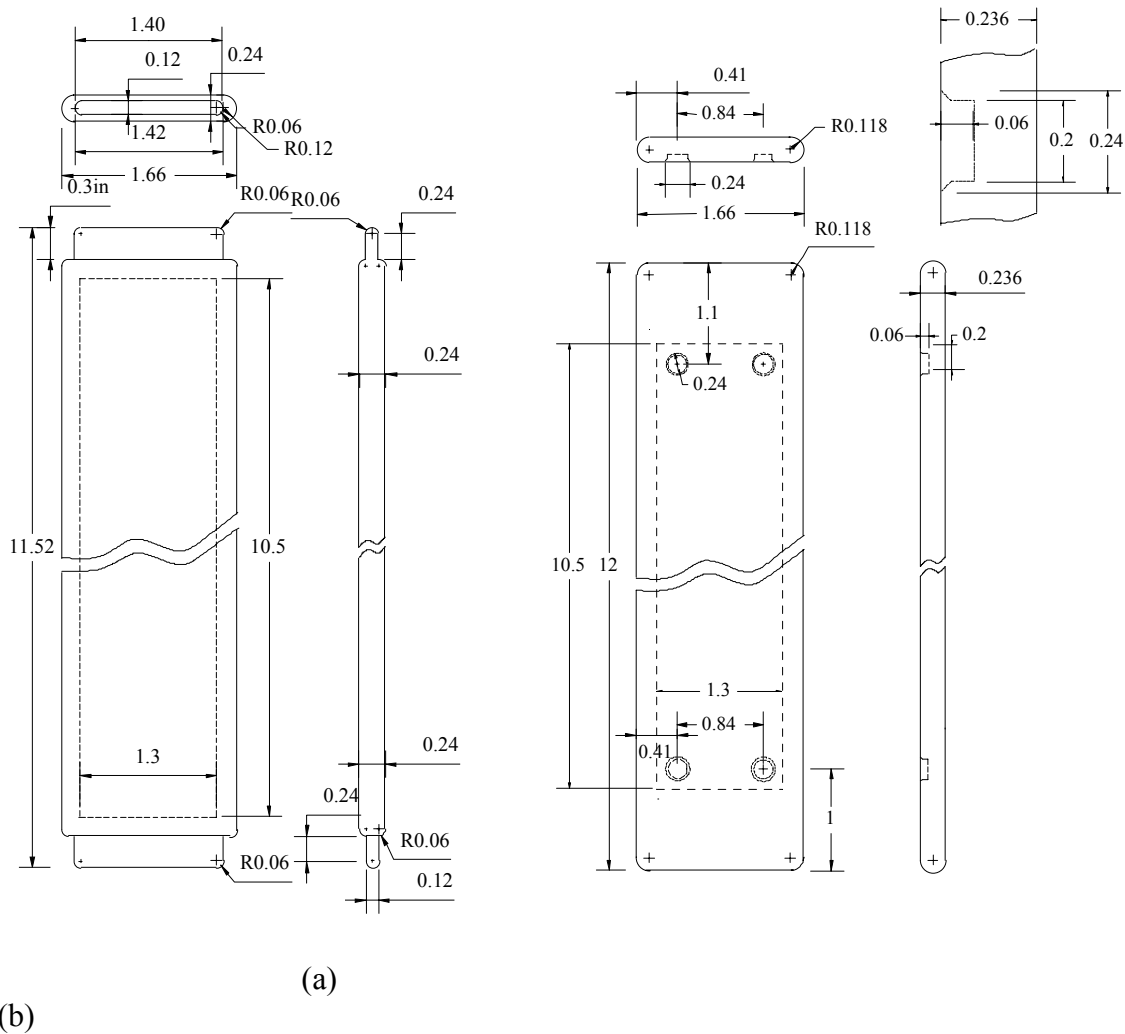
Drawing of the electric field plates (a) Center plate (Plate A). The whole plate will be coated with ITO, HR coating is coated under the ITO for 2 surfaces. (b) Side plates (Plate B, 2 pieces). The area in the dashed line on the surface with blind holes is coated with AR coating. All other areas are coated with ITO coating.
